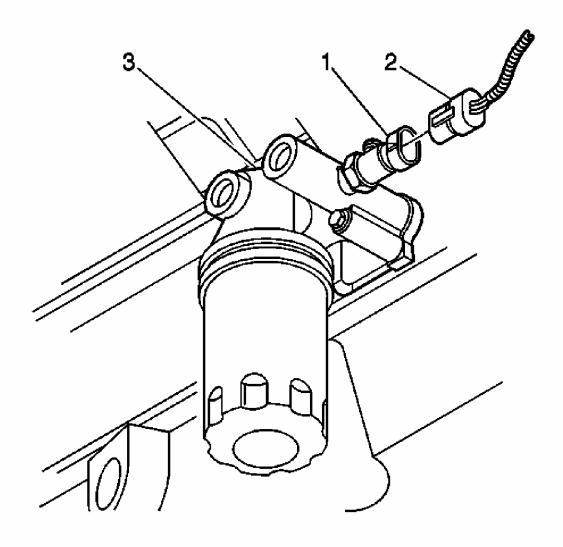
View of Engine Oil Pressure Switch & Electrical Connector Courtesy of GENERAL MOTORS CORP.
